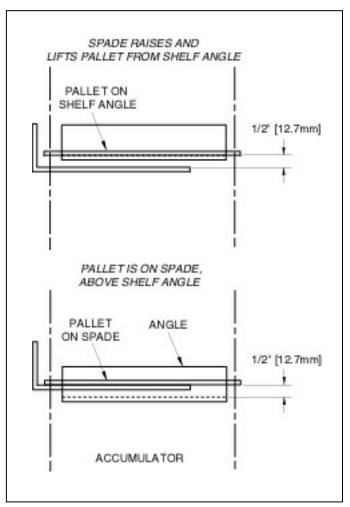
SWITCH LS-12 ADJUSTMENT.
